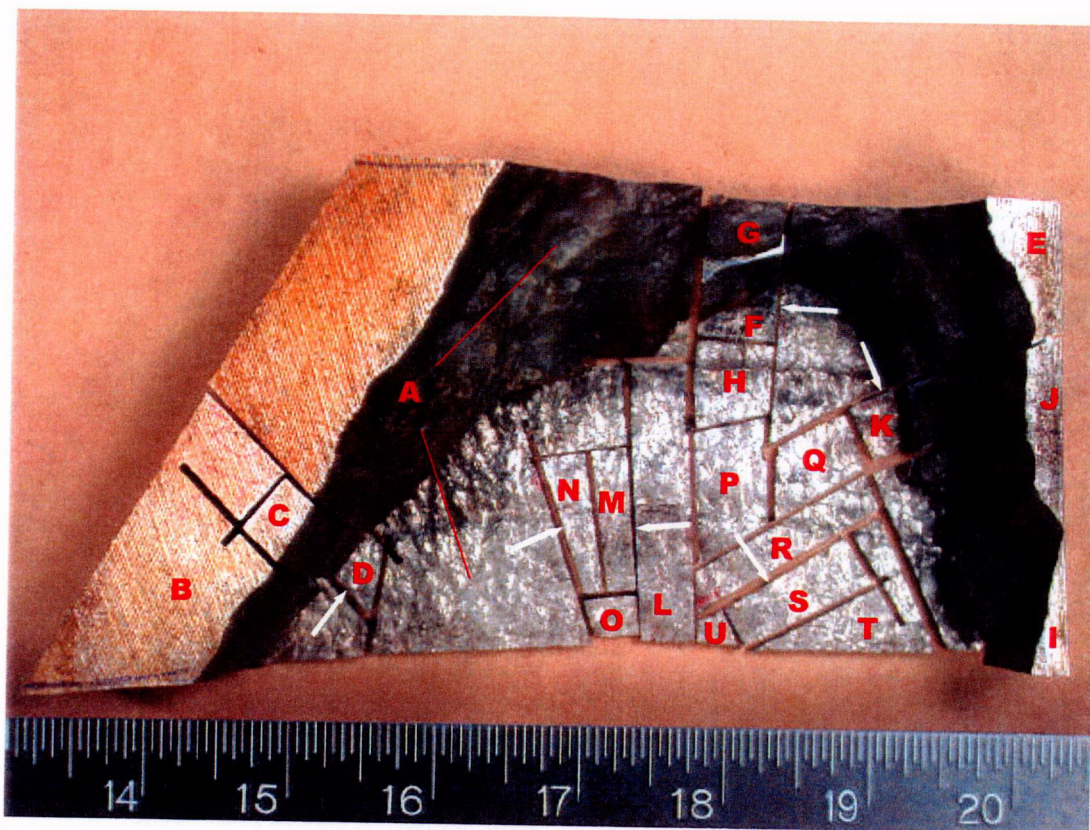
Section photo for Piece A2A7. The mounted surfaces for the -D, -F, -K, -M, -N, and -S samples are indicated by the white arrows. Further sectioning of Piece A2A7L is shown in Figure 5.12.
